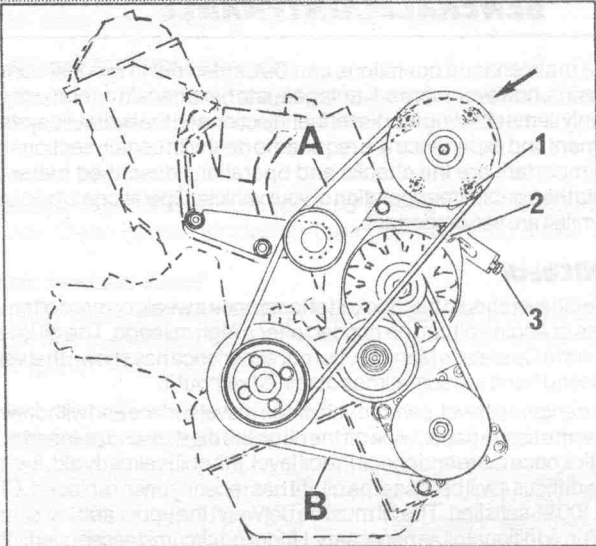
Layout of the drive belts on a model with A/C system. Bolt (1) is used to adjust the belt of the hydraulic pump (A). Bolt (3) and nut (2) are employed to adjust the tension of the alternator and compressor belt (B).
